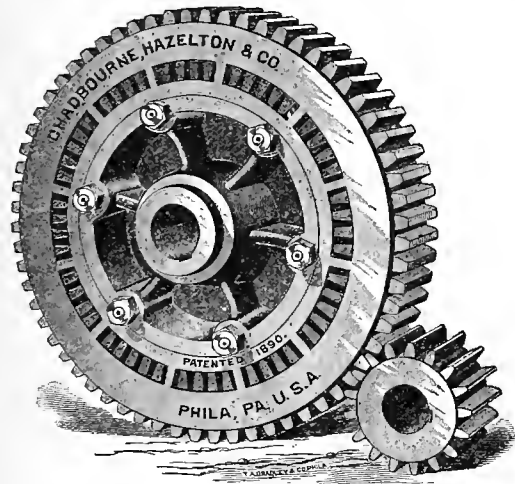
ELECTRIC RAILWAY GEARING—INTERMEDIATE GEAR AND PINION—WOODEN TEETH.
